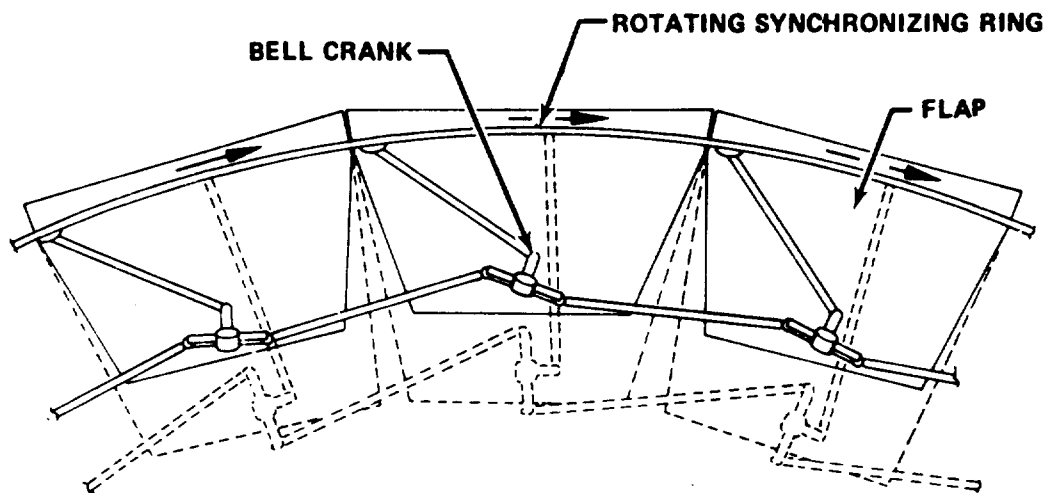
Noncooled Synchronizing Mechanism for Pneumatic-Actuated Exhaust Nozzle
